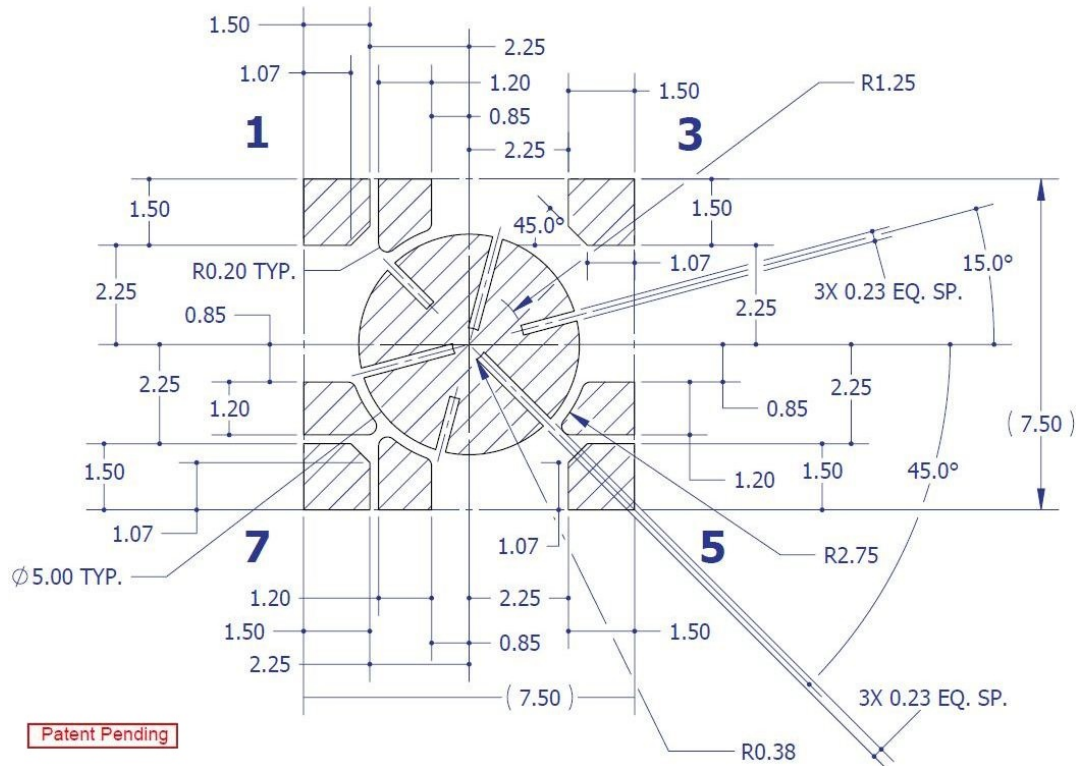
Recommended solder pad layout for anode, cathode, and thermal pad.
